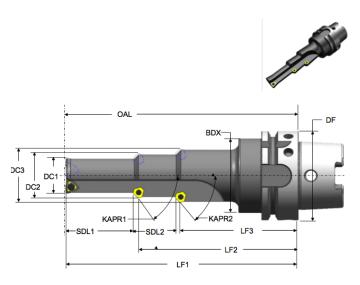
Cutting Tool Measurement Diagram 1 (Cutting Tool, Cutting Item, and Assembly Item – ISO 13399)
